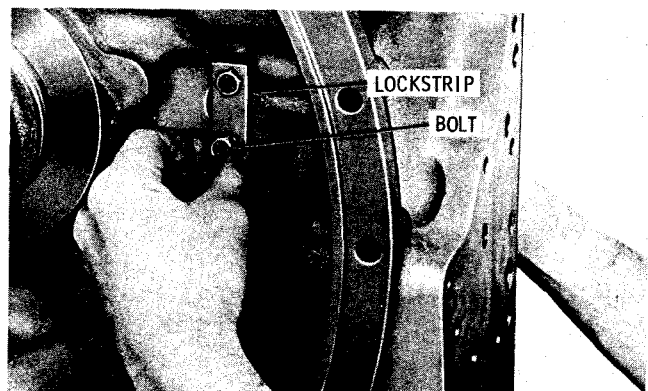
Installing second-pitot tube bolt (CT, CLT, VCLT)
